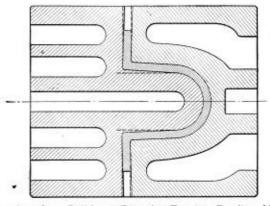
Cast Iron Bulldozer Dies for Forming Bowling Hoops— Cross Section
